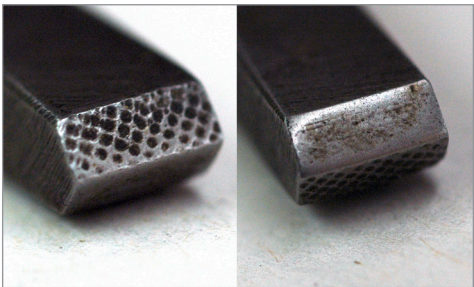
This is a matting tool plate owned by Tom Herman.
